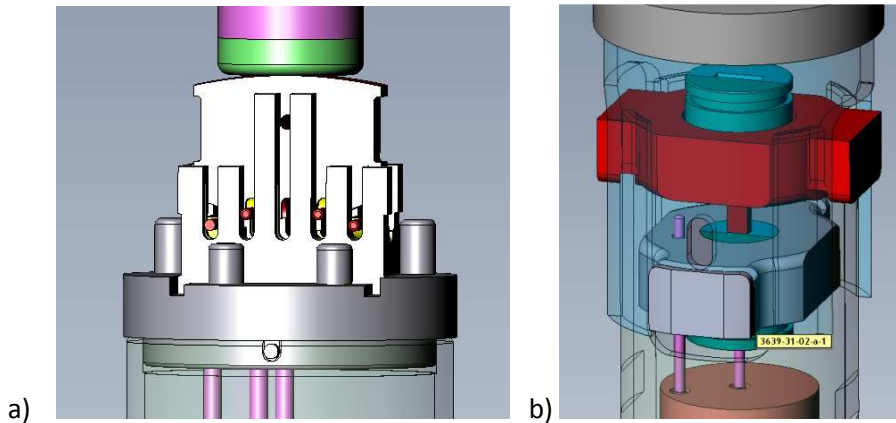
Fixtures for mechanical tests for: a) bending tests (3 or 4 points) ; b) tensile tests
